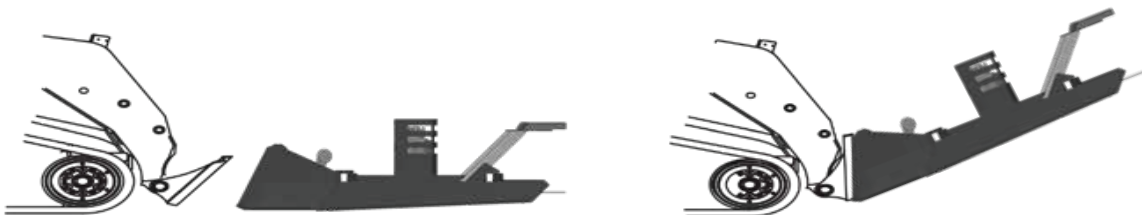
A - QUICK ATTACH COUPLER LOCKED TO ATTACHMENT
